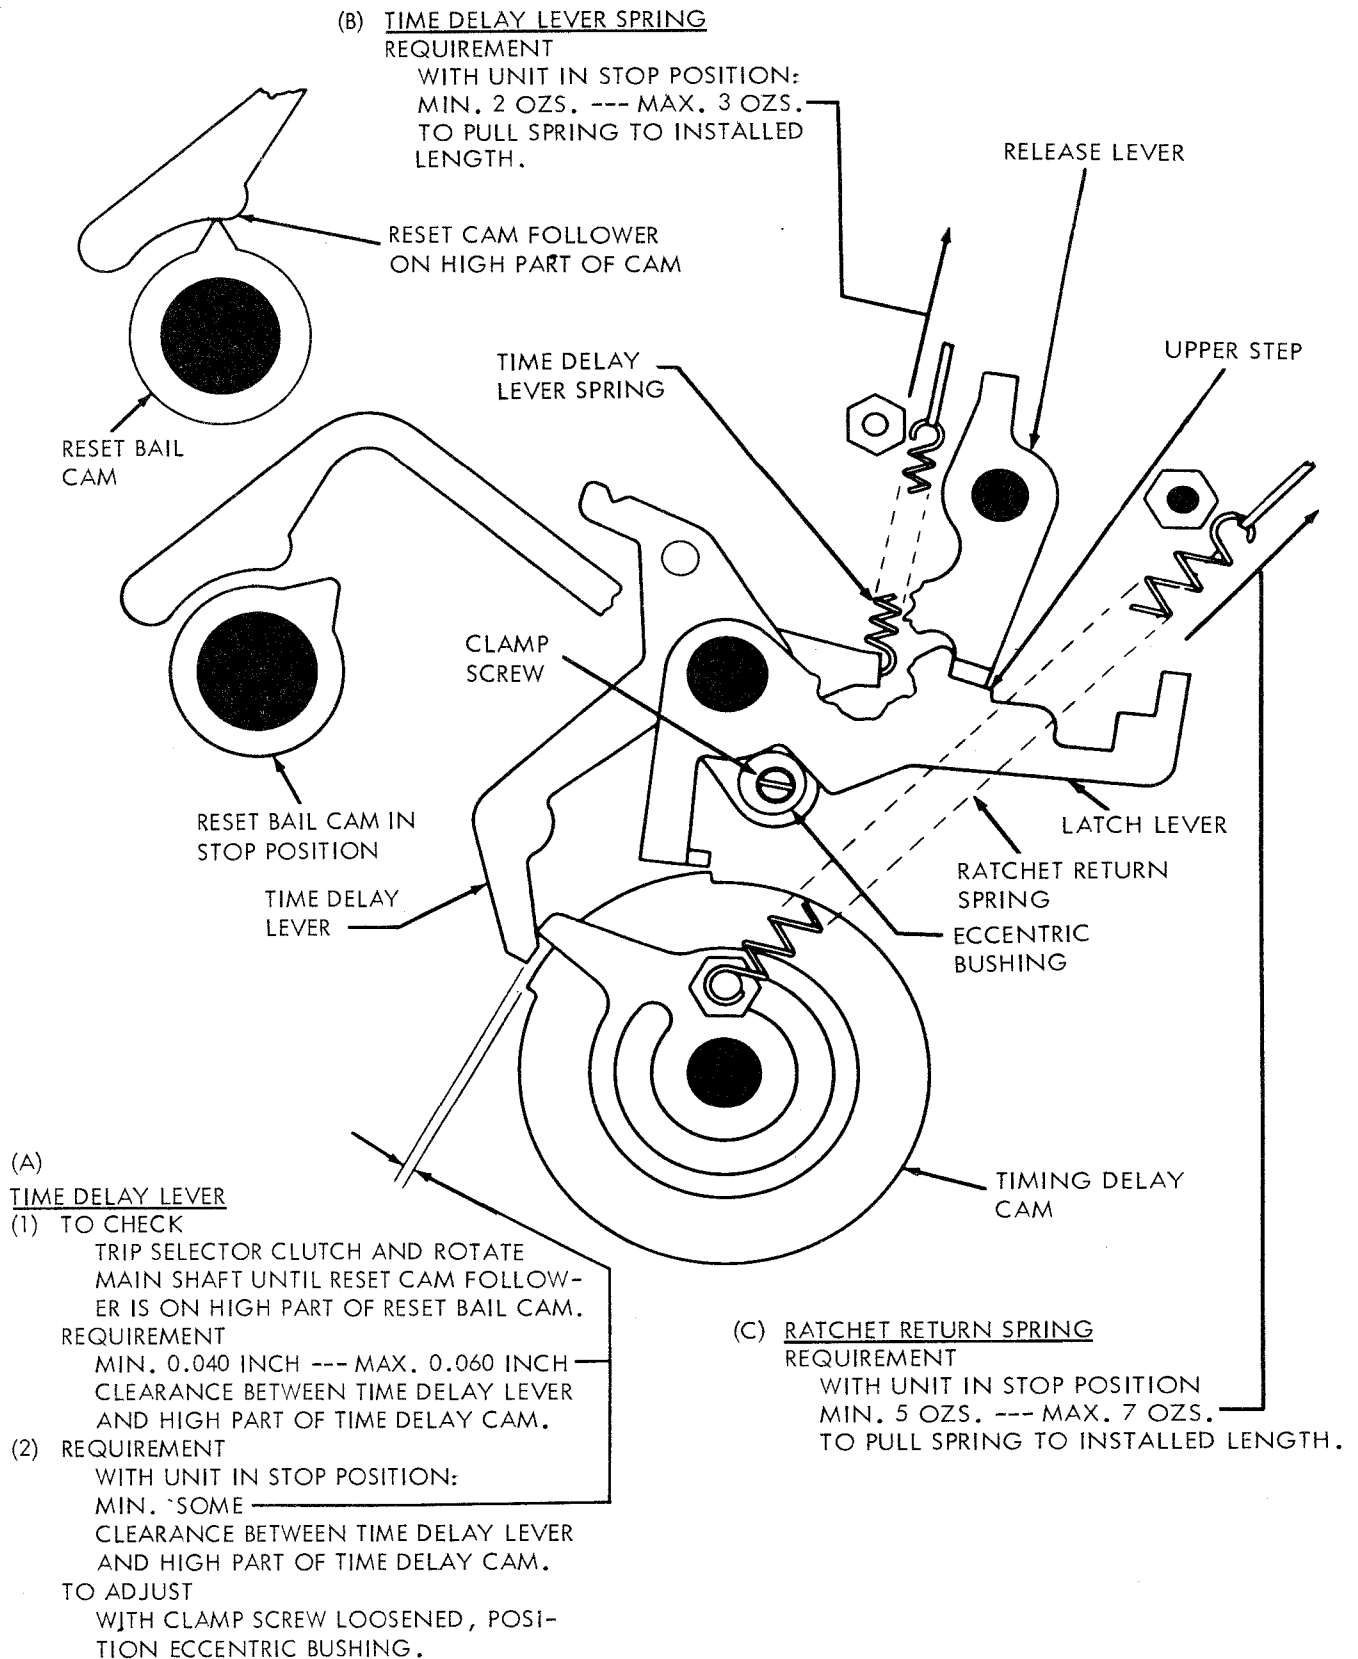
E. TYPING REPERFORATOR TT-375/UG, REMOTE CONTROL NON-INTERFERING BLANK TAPE FEED-OUT MECHANISM
